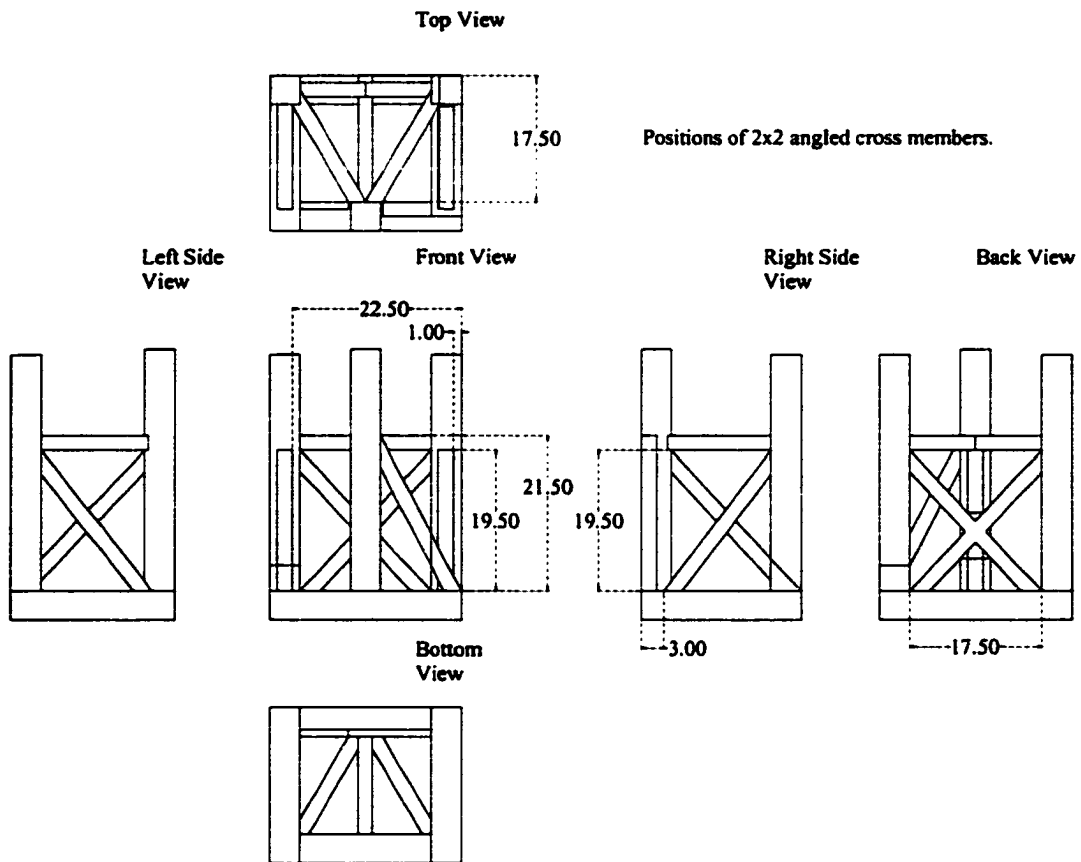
Design drawings for the STM Vacuum Chamber Stand depicting positions of 2 × 2 inch tubes.
